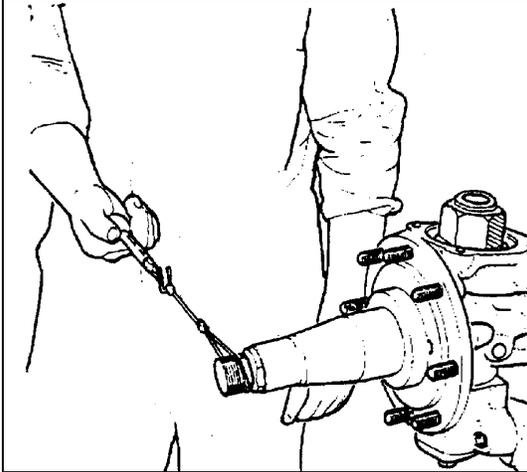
METHOD OF CHECKING SWIVEL BEARING ADJUSTMENT 10017
